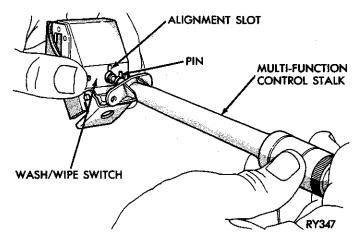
Multi-Function Control Stalk Removal/ Installation
